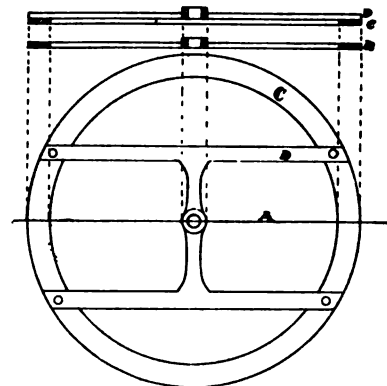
PLAN AND SECTION OF FIFTH WHEEL.
